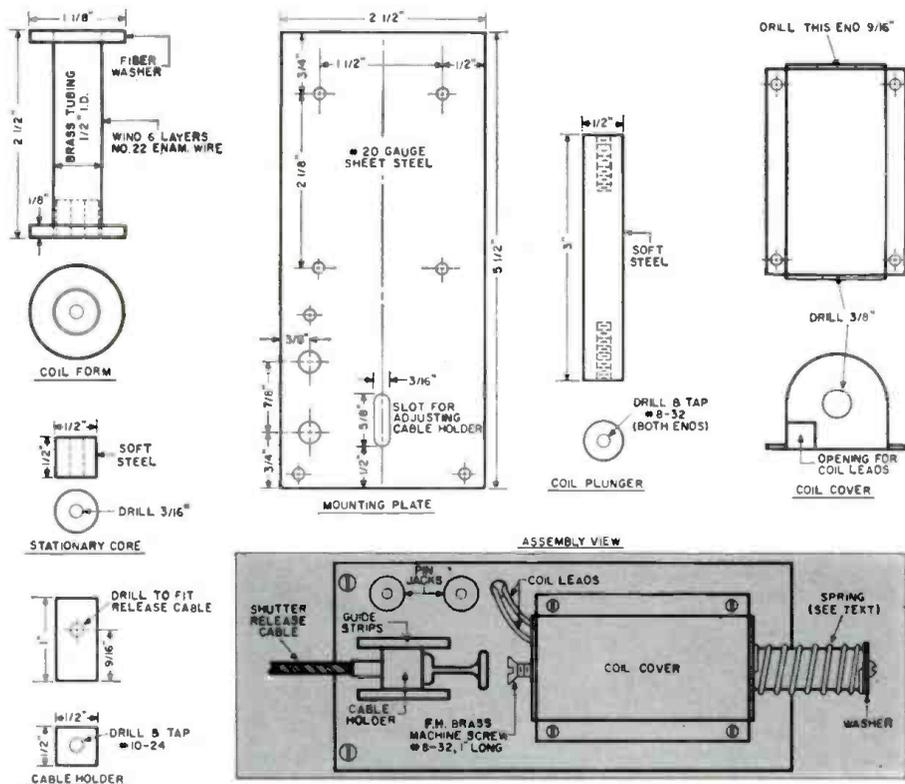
Mechanical details showing construction of the shutter cable coil.
